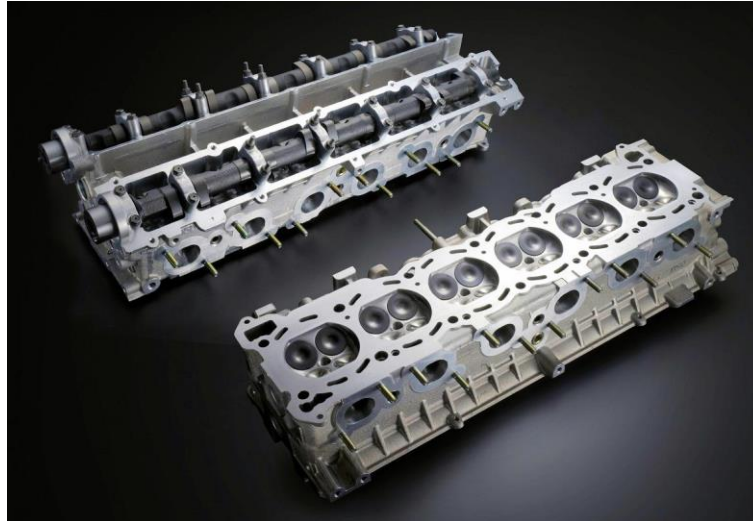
TOP AND BOTTOM VIEW OF A NISSAN RB26DETT FOUR-STROKE, SI, SIX-CYLINDER ASSEMBLED CYLINDER HEAD.
